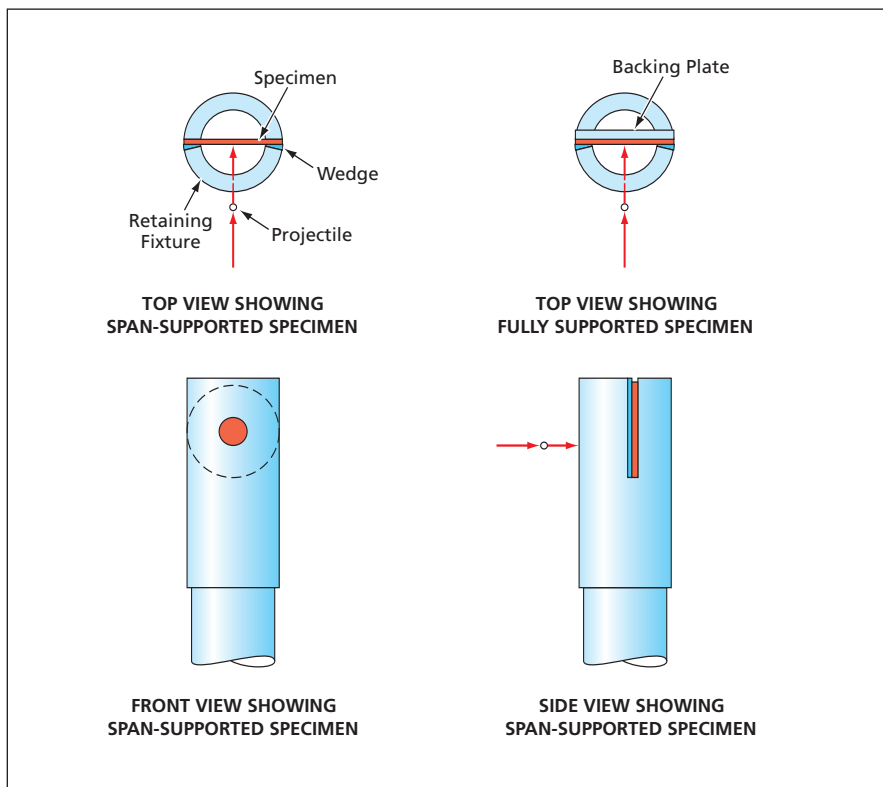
The Specimen Is Held on the Retaining Fixture by means of wedges in tapered slots. The slots can be dimensioned to provide span support of the specimen or to accommodate a backing plate for full support of the specimen.
